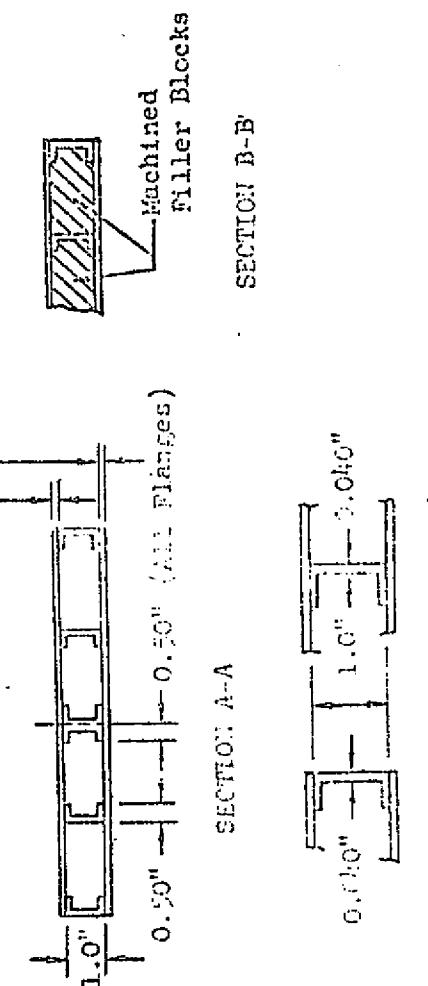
Built-up Wings 2 and 3 - Geometry and Details
